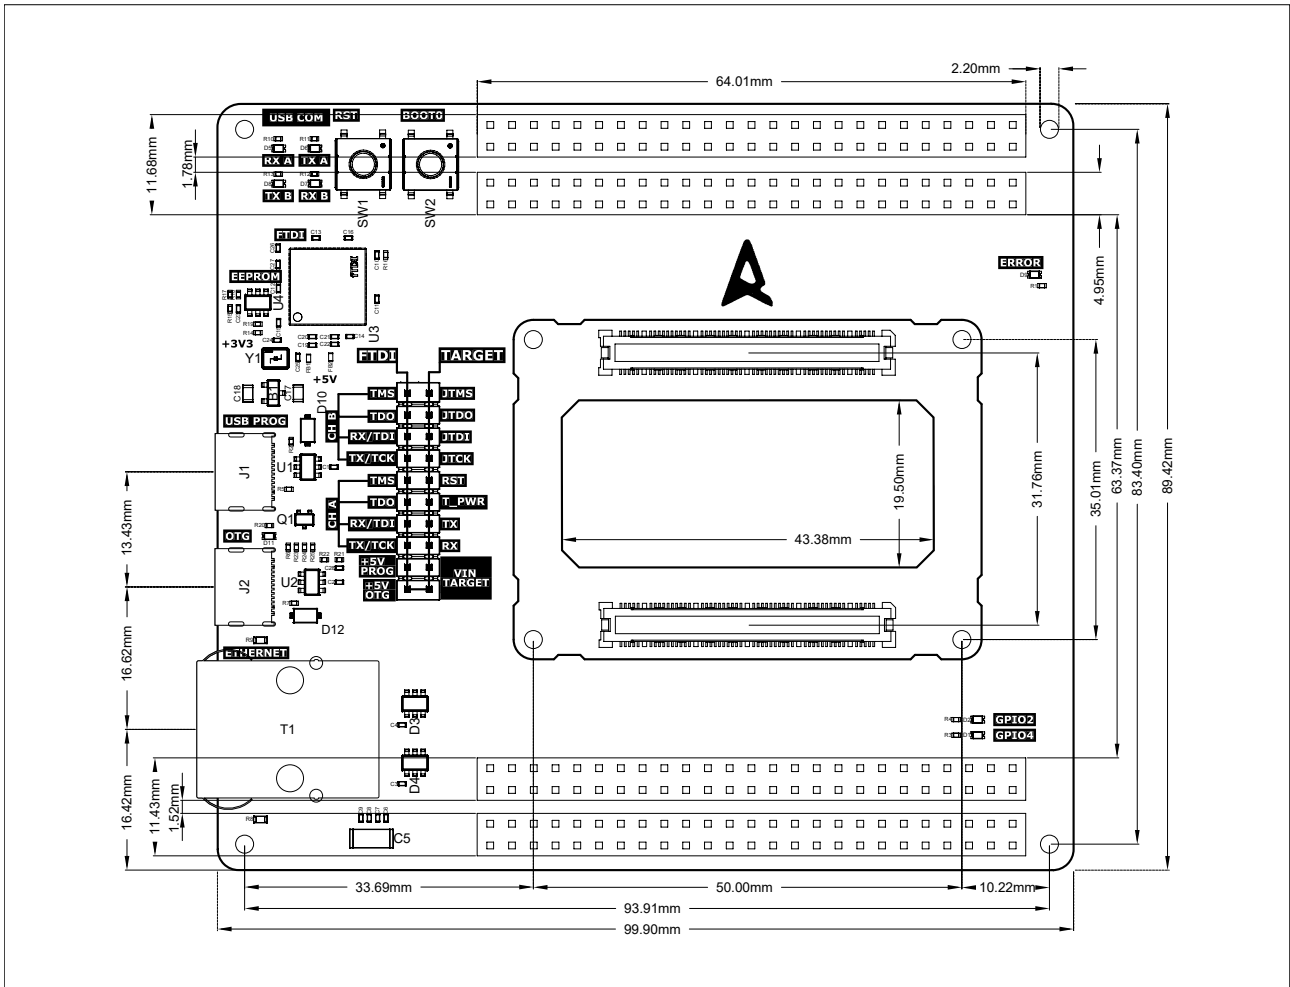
Mechanical drawings of the Carrier Board DEV-ETH Board.
